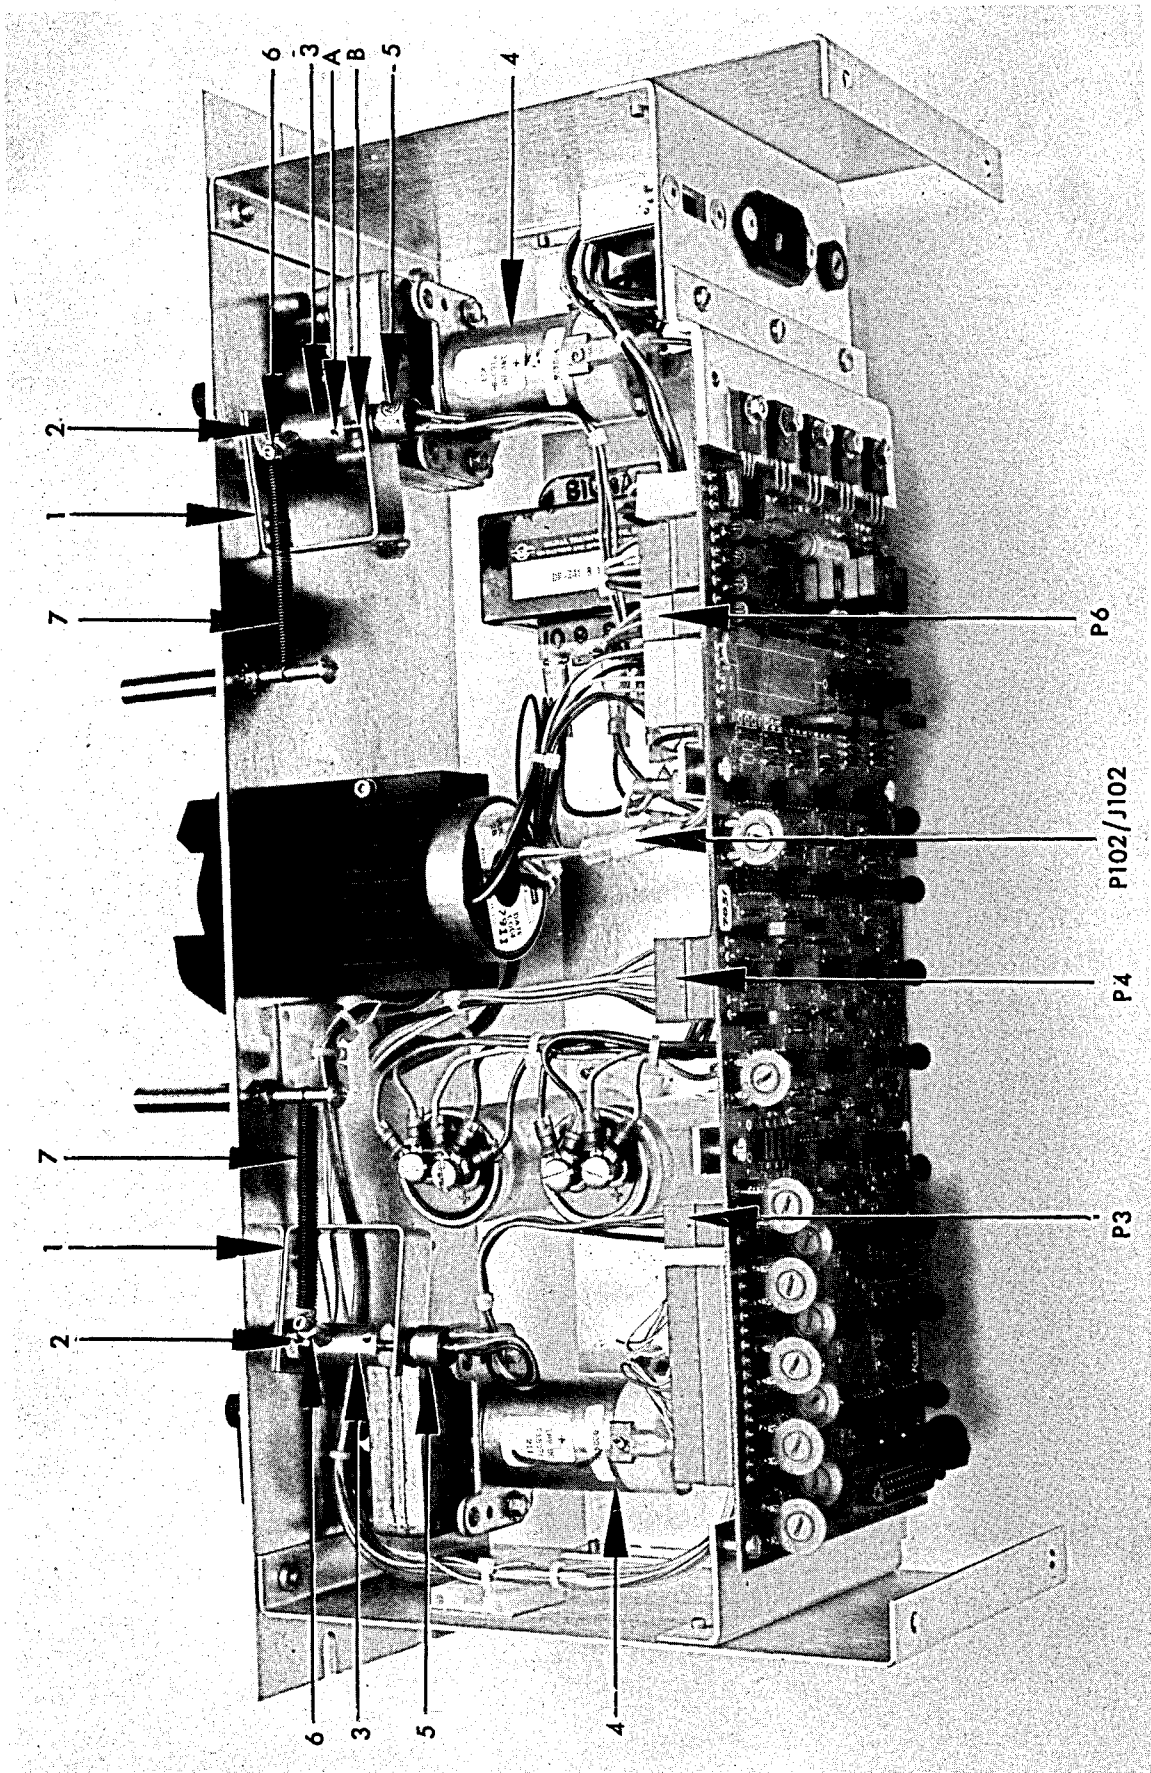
Front Panel, RRS7155BA1/660/G-A, Rear View.
